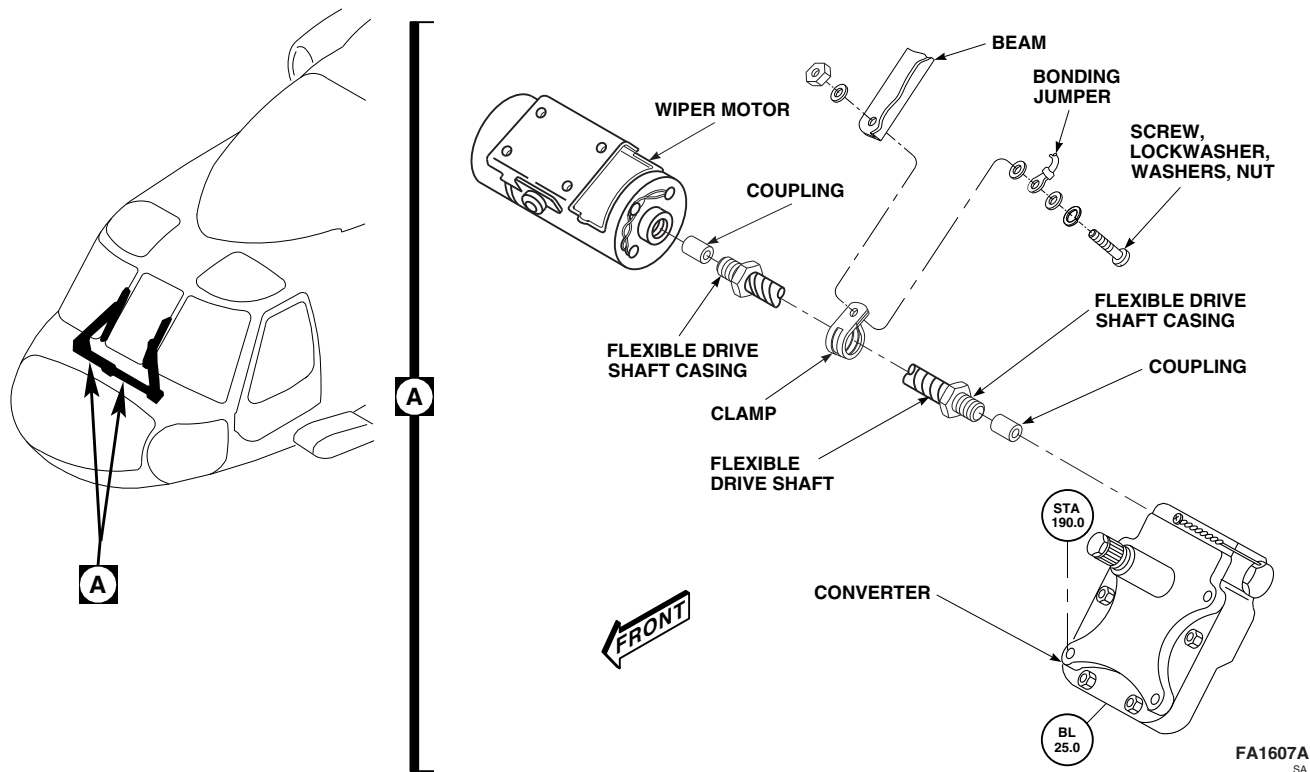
REPLACE WINDSHIELD WIPER FLEXIBLE DRIVE SHAFT
